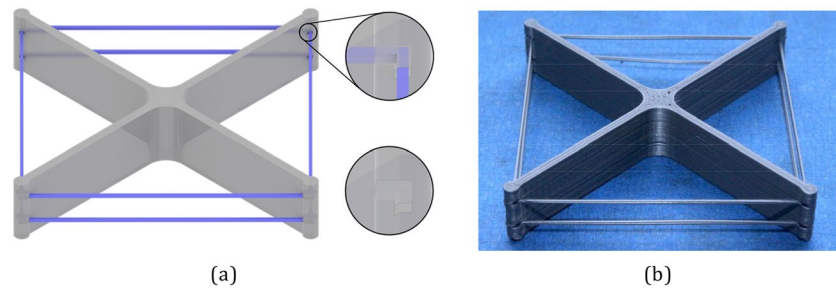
a Technical drawing and b CAD model of the unit cell (UC)
